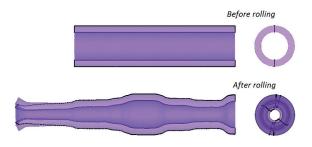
Twisting of workpiece longitudinal section caused by skew rolling
